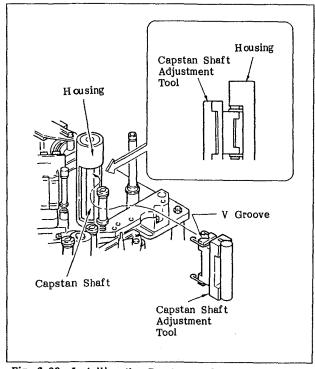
Installing the Capstan Shaft Adjustment Tool
